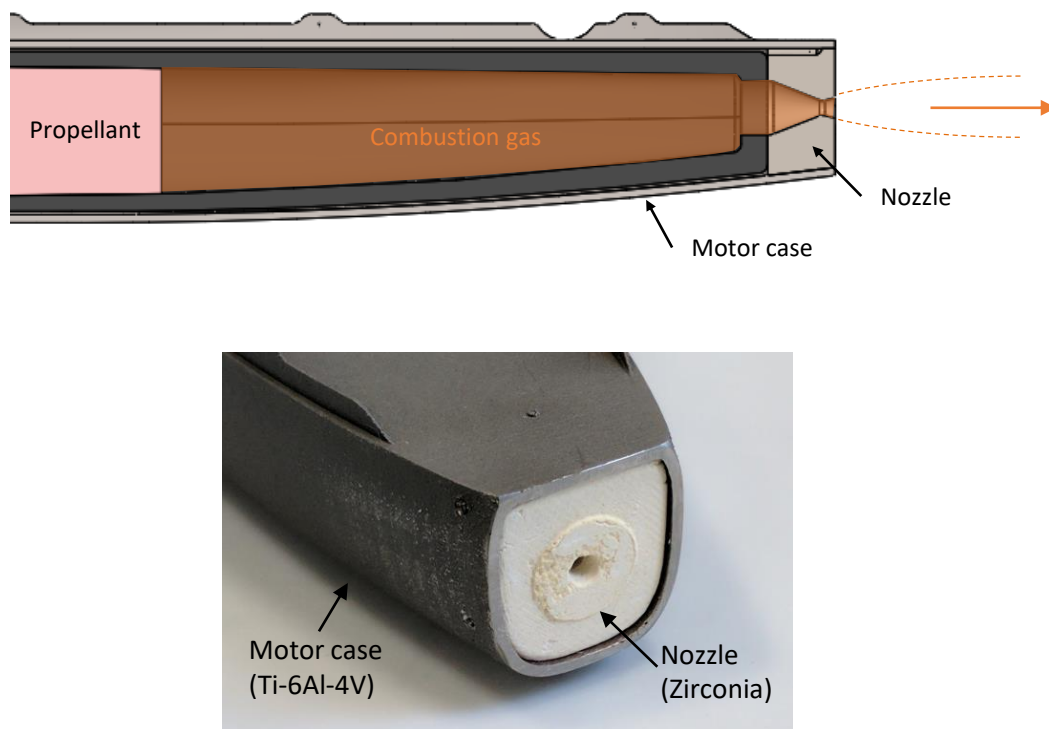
A solid zirconia nozzle was used on Firefly v1. Top: section view of the nozzle design. Bottom: the nozzle, just before being bonded into the motor case.
